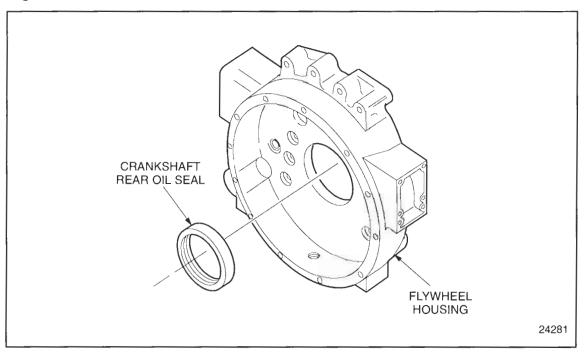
Crankshaft Rear Oil Seal Mounting in Flywheel Housing
